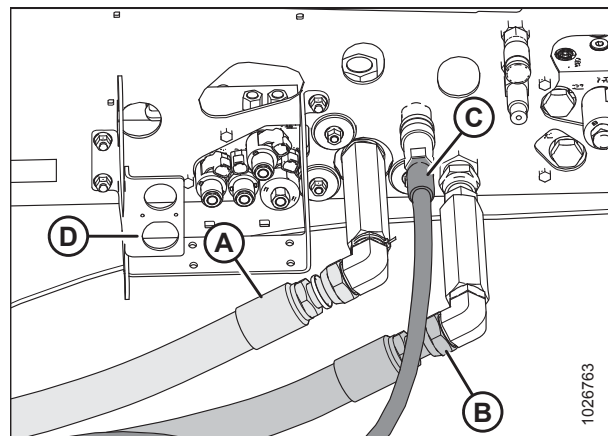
Hard-Plumbed Hydraulic and Electrical Connections on a Rotary Disc Ready Windrower
